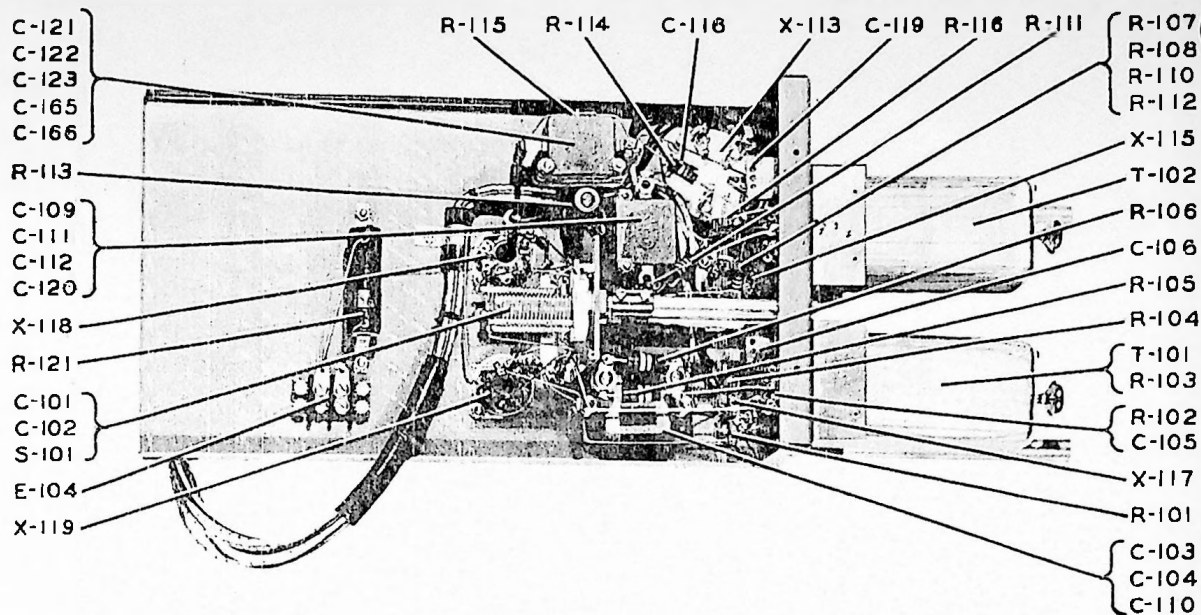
RF Chassis Parts Arrangement, Bottom View
